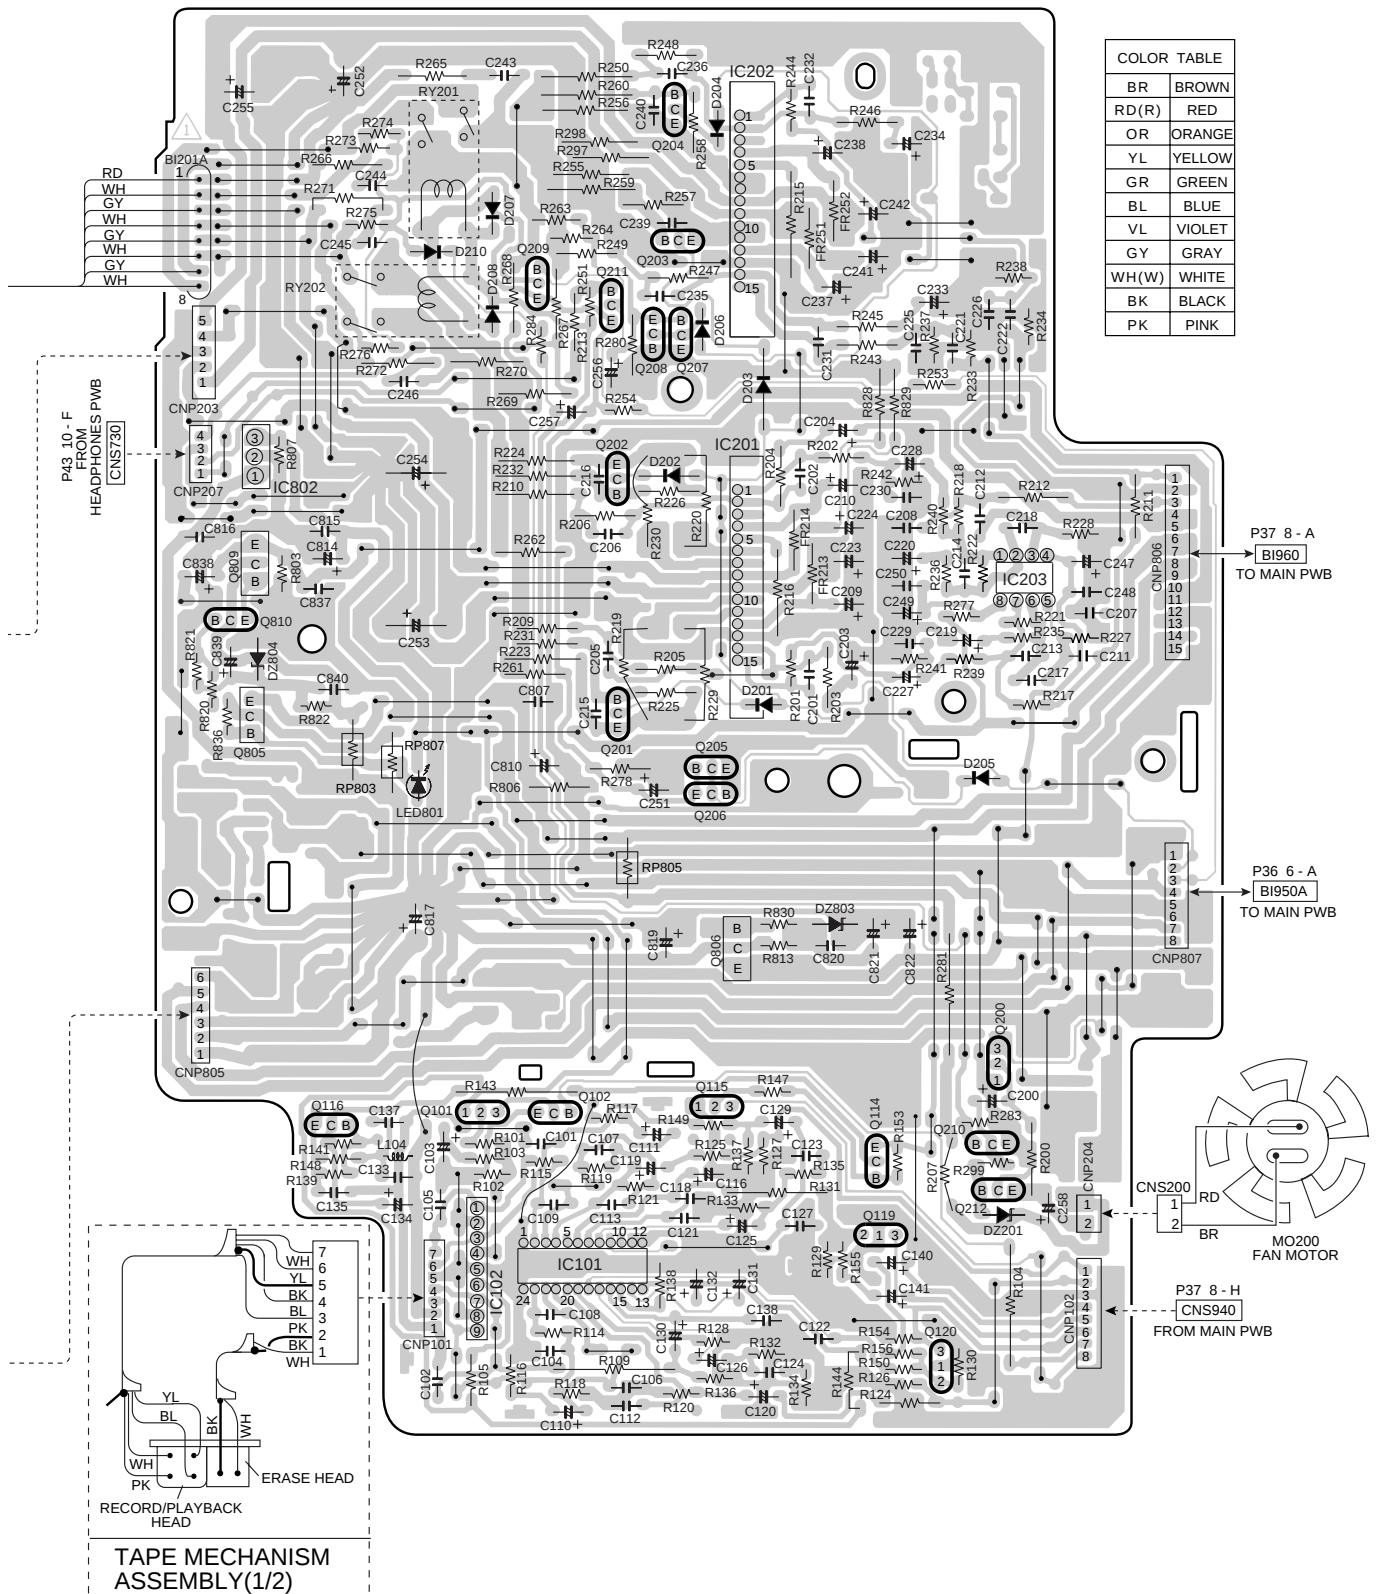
WIRING SIDE OF P.W.BOARD (4/10)
